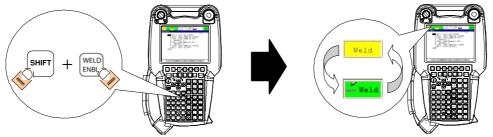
(b) Switching Operation of Weld Enabled/Disabled by WELD ENBL Key
